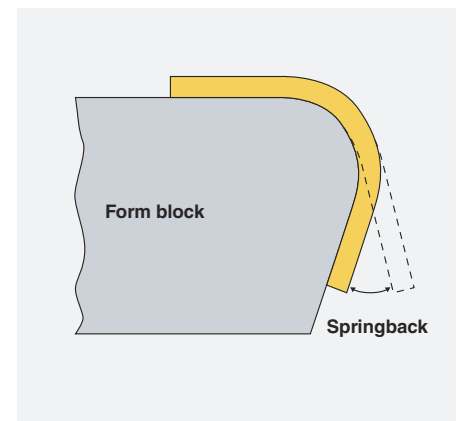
Forming or bending of metal over a forming block results in some springback. This has to be taken into account when planning forming operations to ensure the correct final dimensions. (16)
